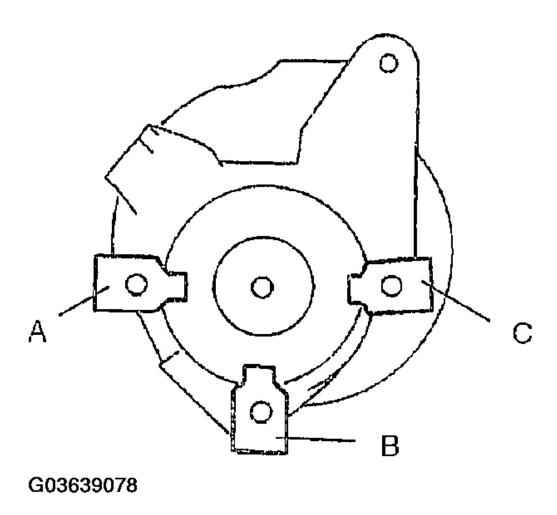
Identifying Fuel Gauge Terminals Courtesy of MAZDA MOTORS CORP.
